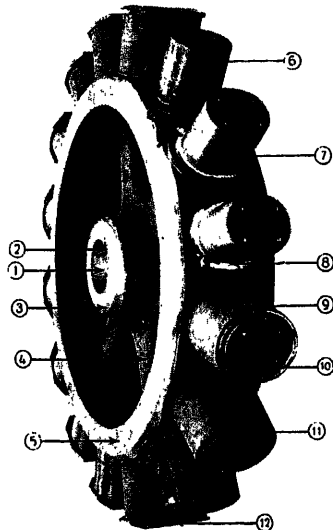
Rotor of cast steel with field coils for modern three-phase generator.
